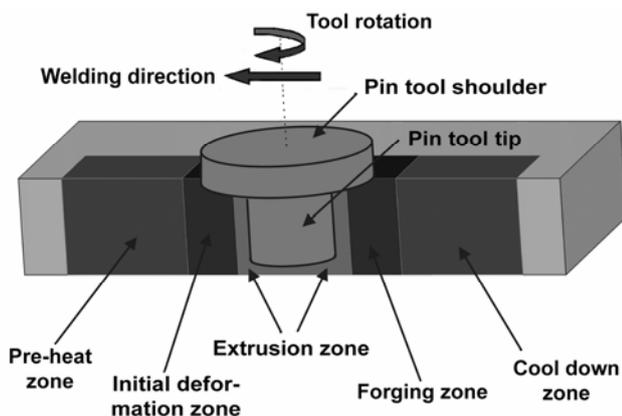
Scheme of the principle of friction stir welding for metals [3].
